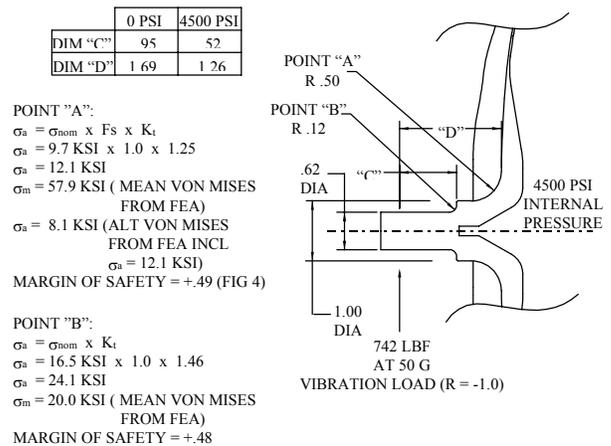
STINGER END FITTING VIBRATION FATIGUE ANALYSIS @ 4500 PSI
